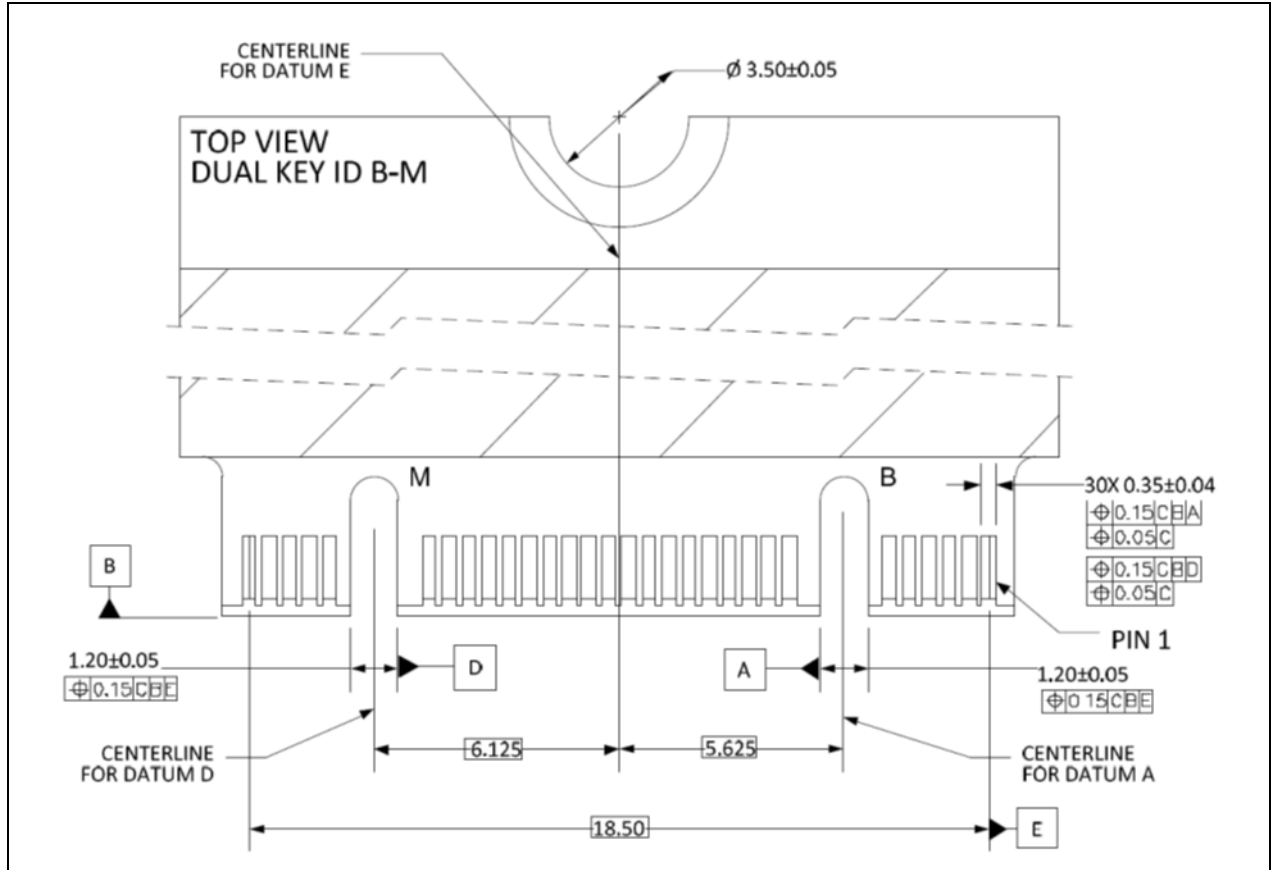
Dimensions for 80 mm single-sided M.2 Form Factor Drives (2280-S3-B-M)
